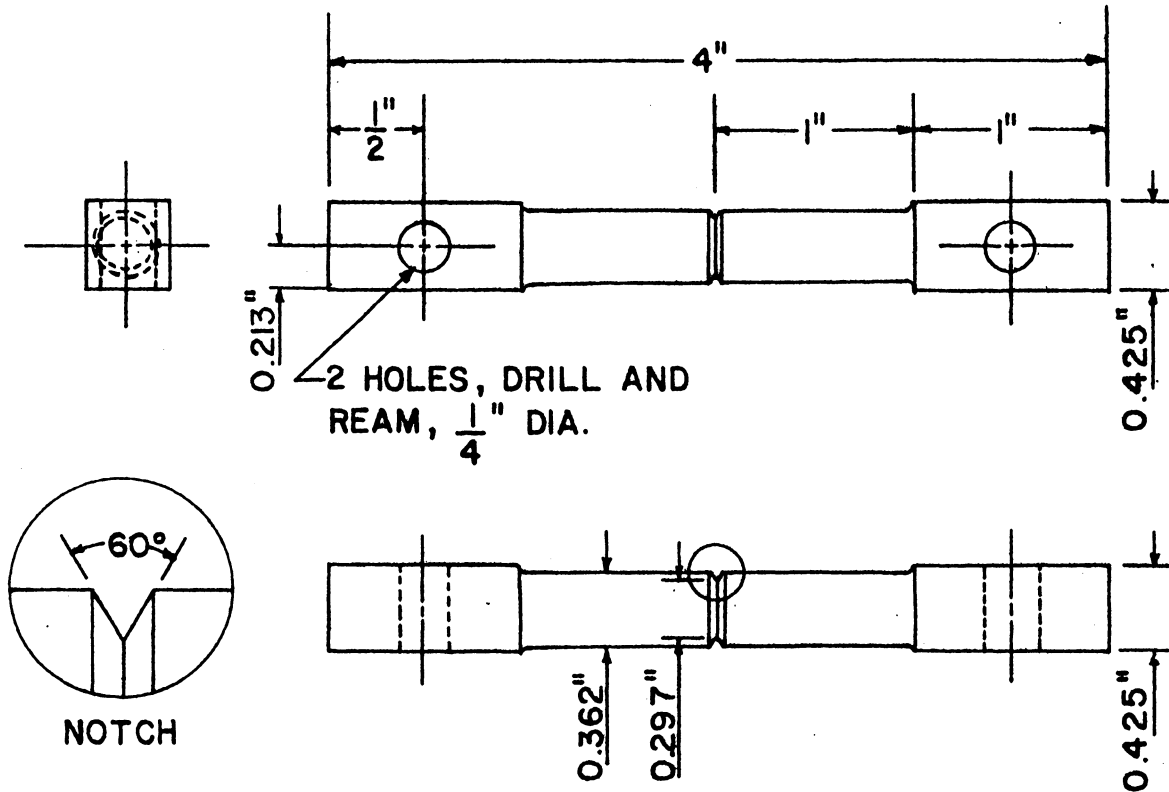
SPECIMEN DIMENSIONS - SERIES A
